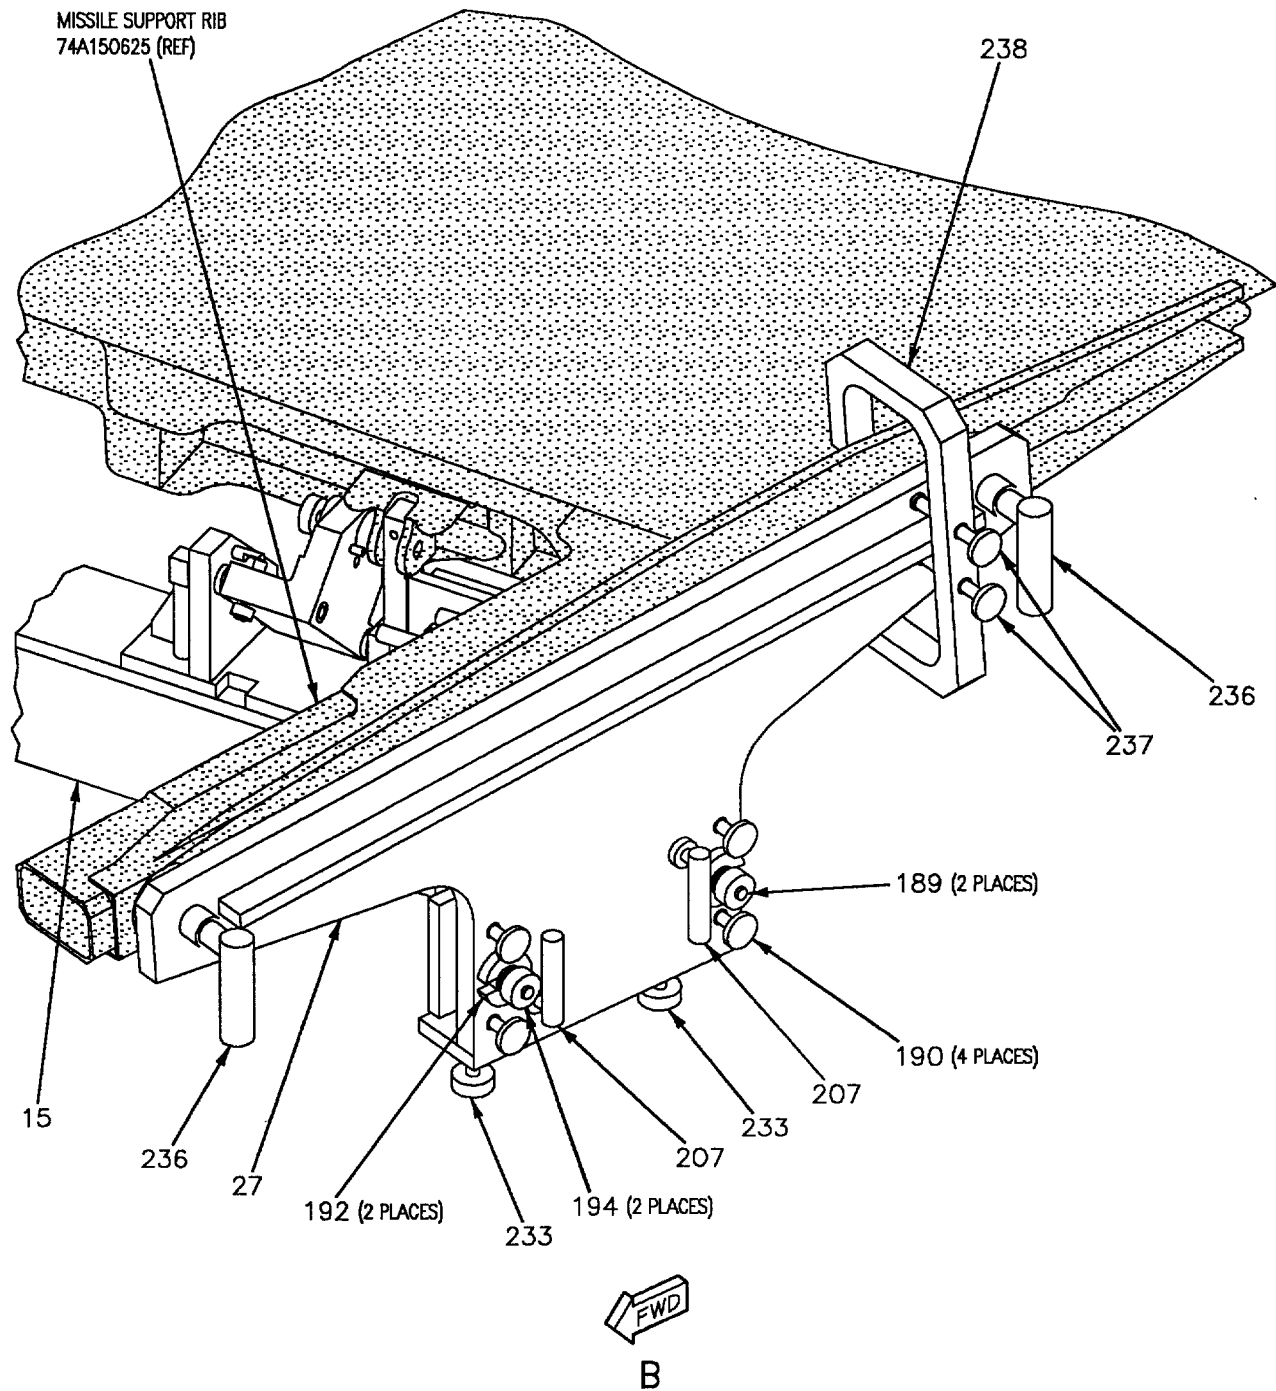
Locating Tool on Outer Wing (Sheet 2)
